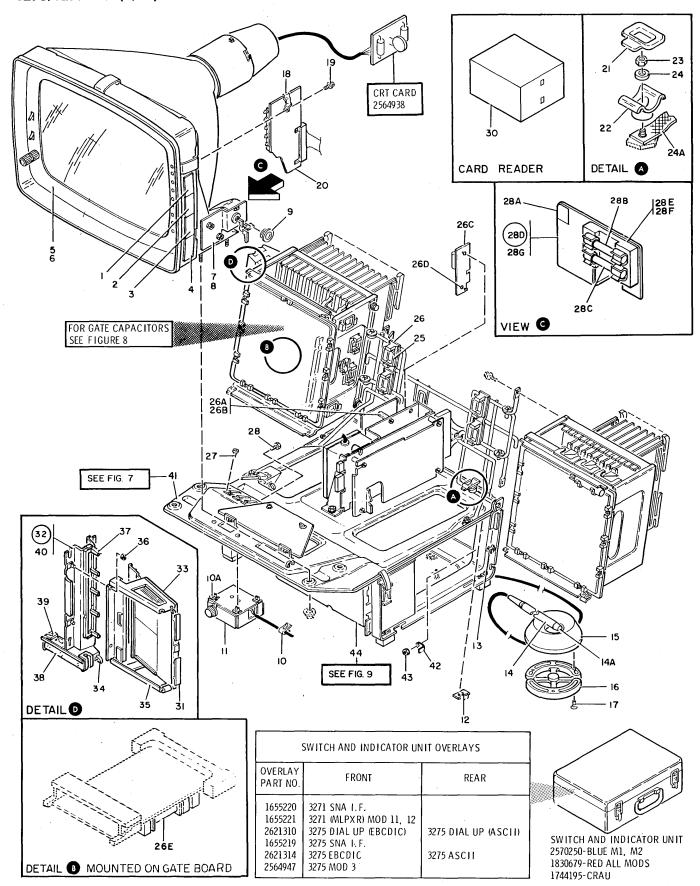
3275 All Mods and 3277 Mod 2 Final Assembly
